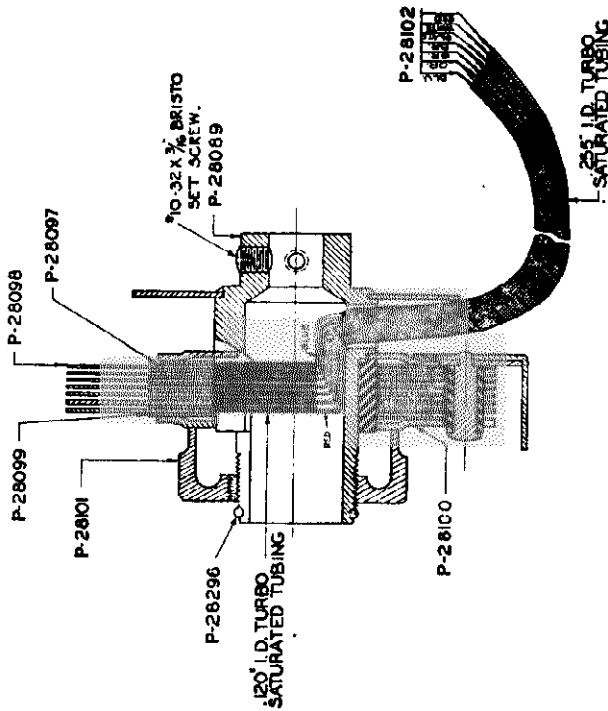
Section View of Flash Tuner Contactors Assembly.
